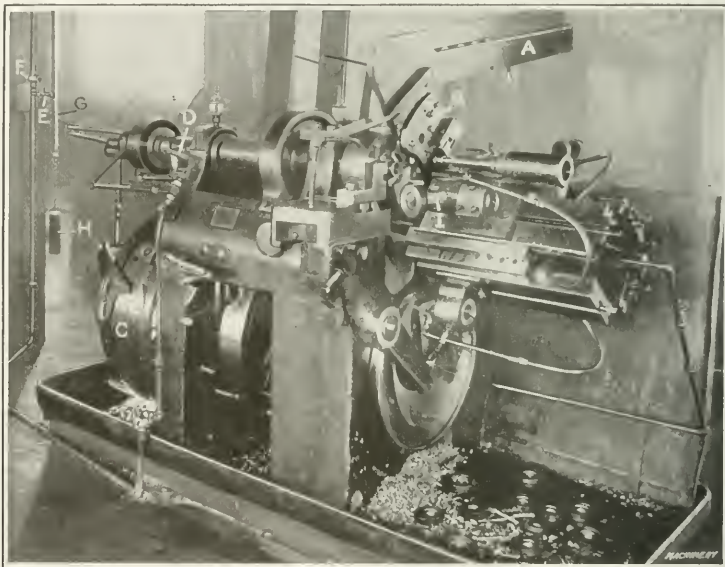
Gridley Automatic equipped for roughing out Blanks for Cutters used on the Fellows Gear Shaper
